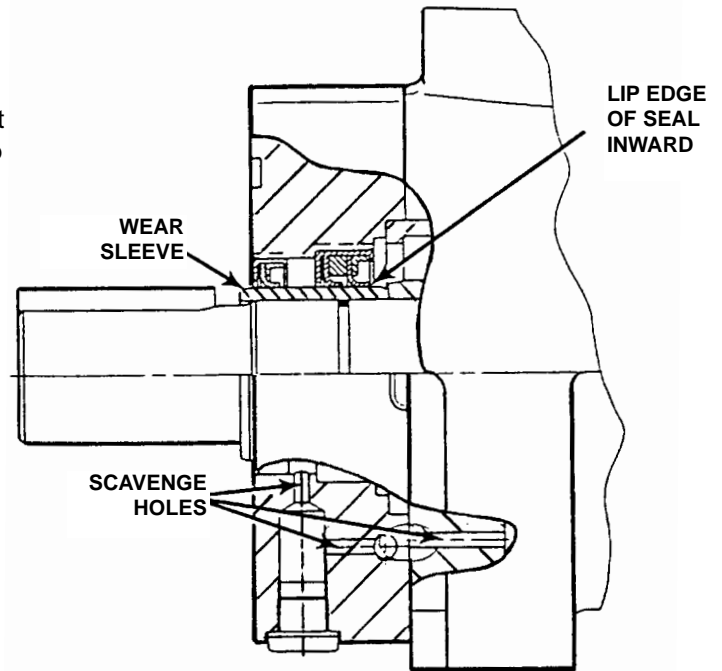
SHAFT SEAL ASSEMBLY
